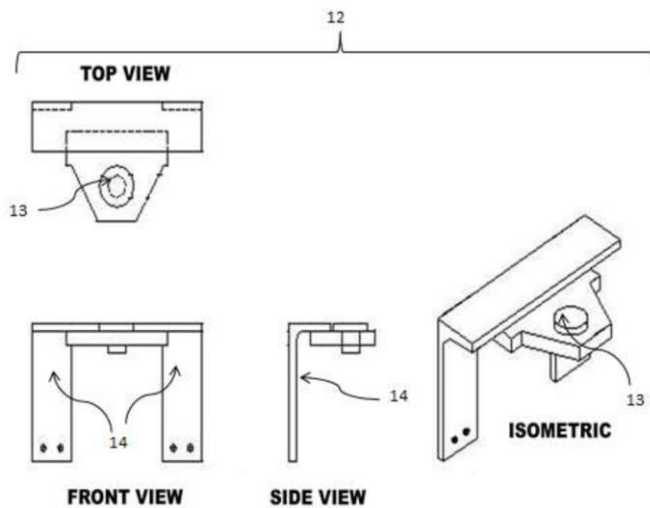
Detailed top view, front view, side view and isometric view of the guide bushing-assembly of the present invention.
